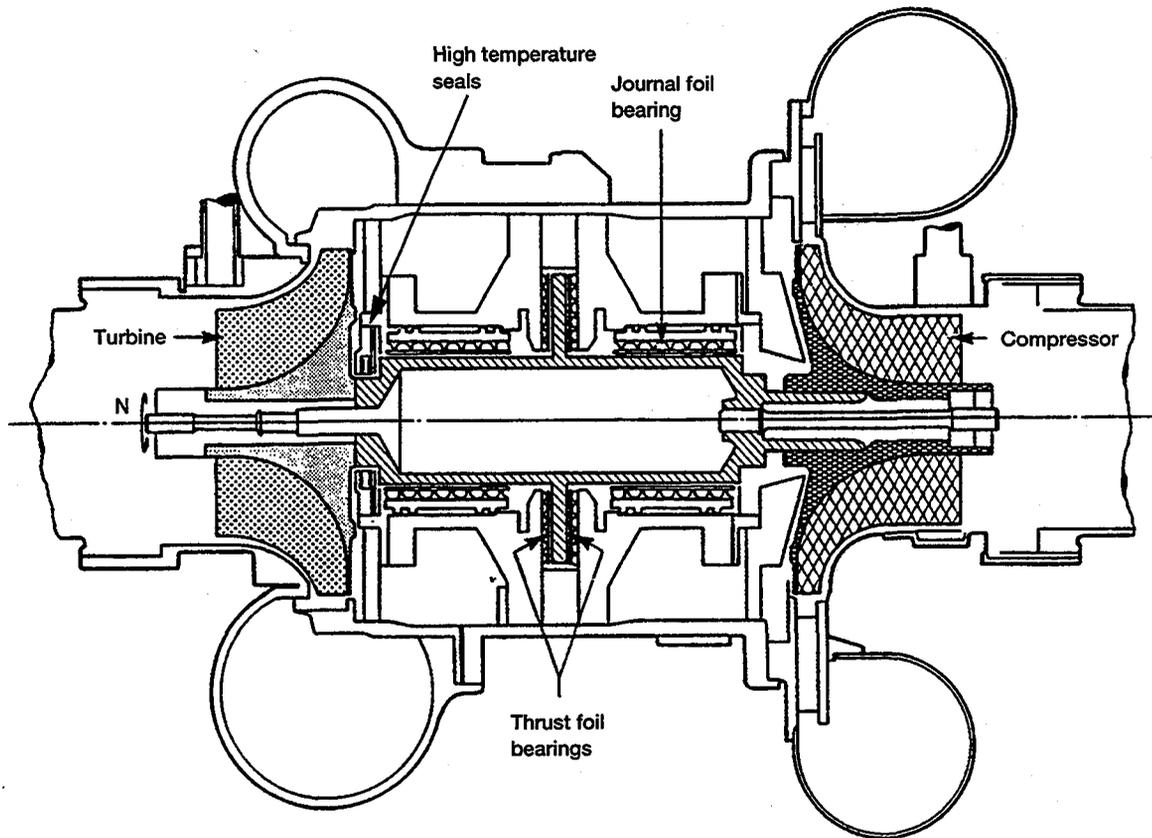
Schematic cross section of foil gas bearing supported turbocharger. Adapted from ref. 20.
